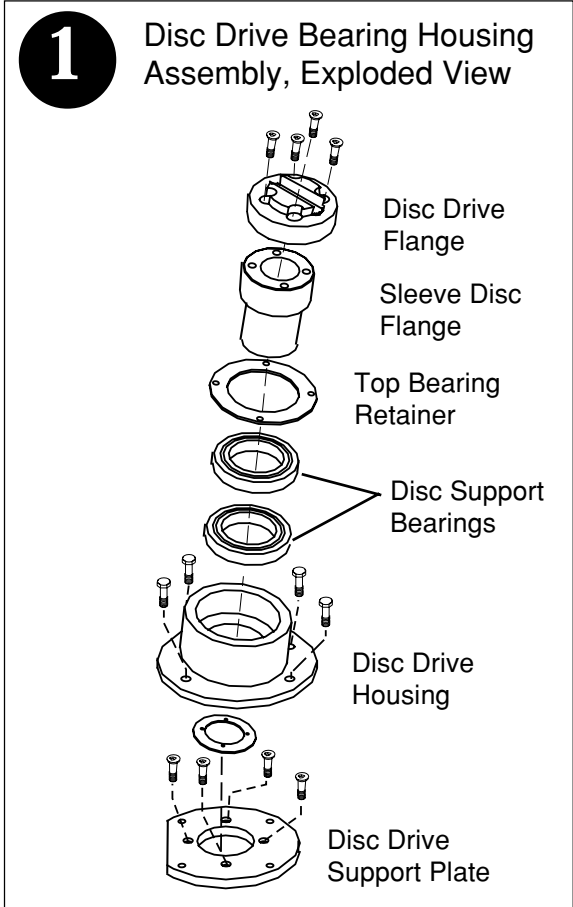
FT-40/50-RD Spindle Assembly - Exploded Views
